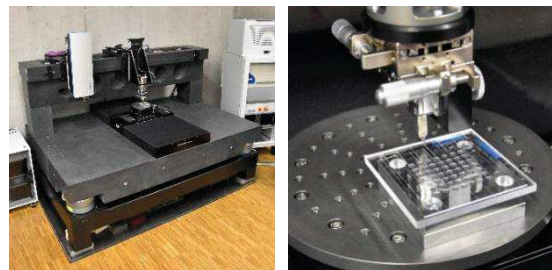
USM (left) and tool center point with linear structured grooves in PMMA (right)
